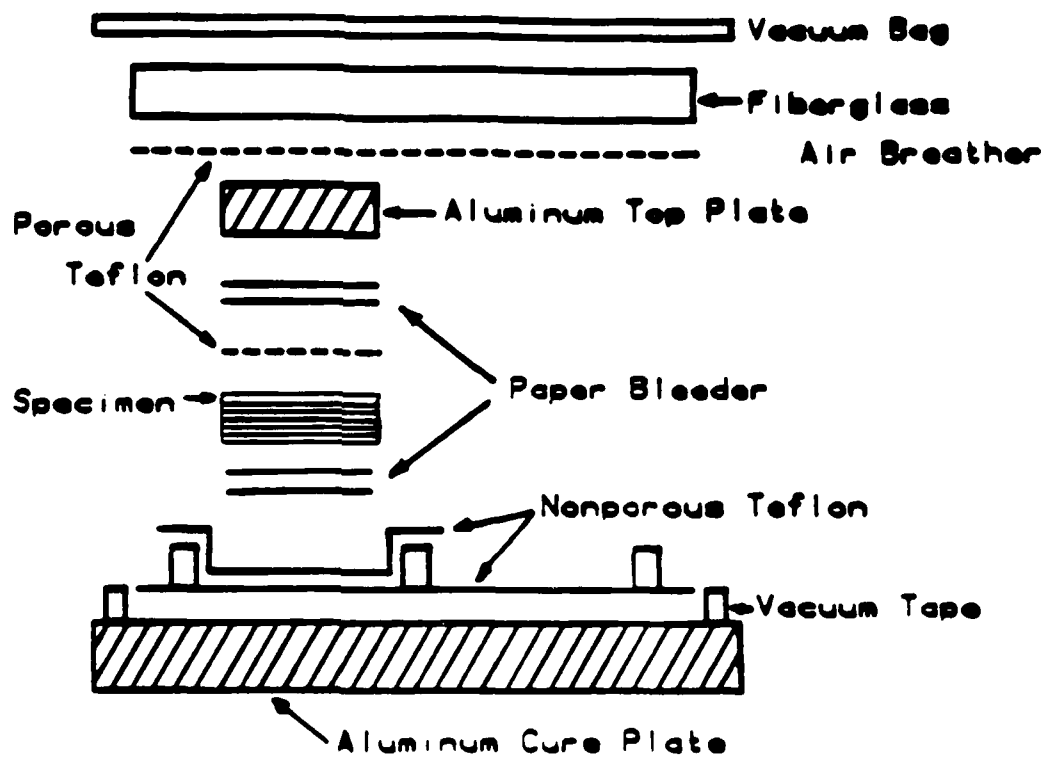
Schematic of Curing Assembly Cross-Section
